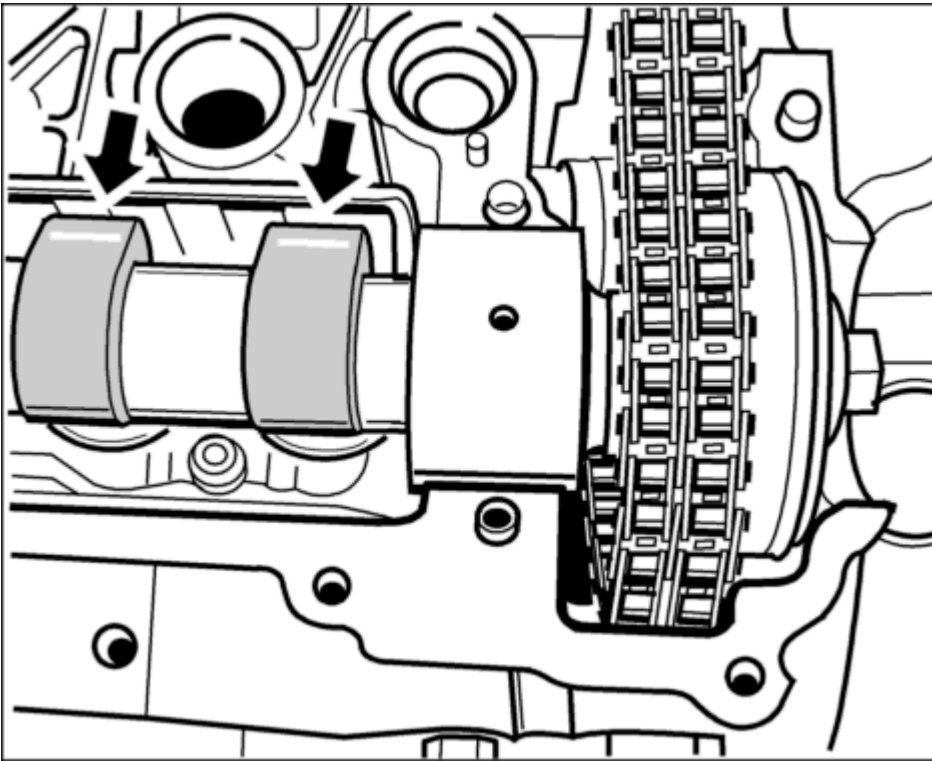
Cams of cylinder 4 pointing toward bulkhead
